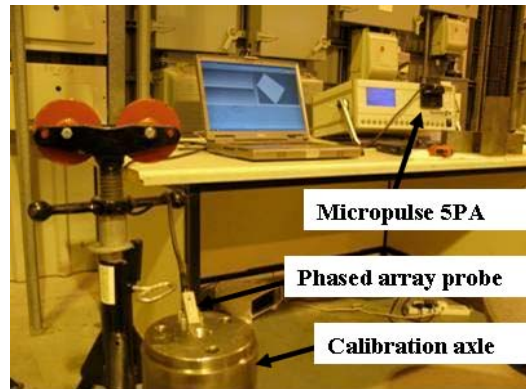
Experimental set up and apparatus used to inspect the test axle blocks
